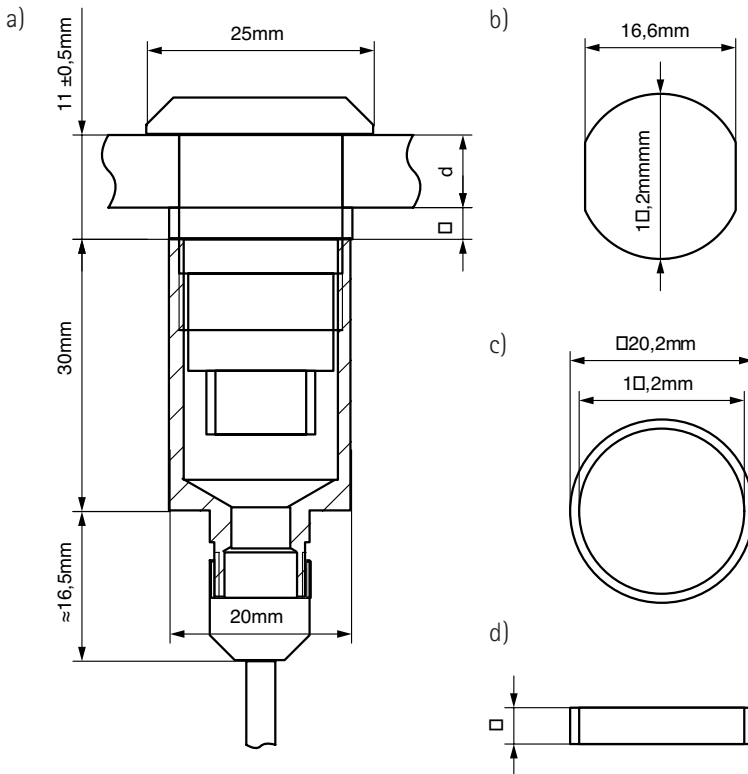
a) Sectional drawing, b) lid cut out, c) top view of washer, d) side view of washer.
